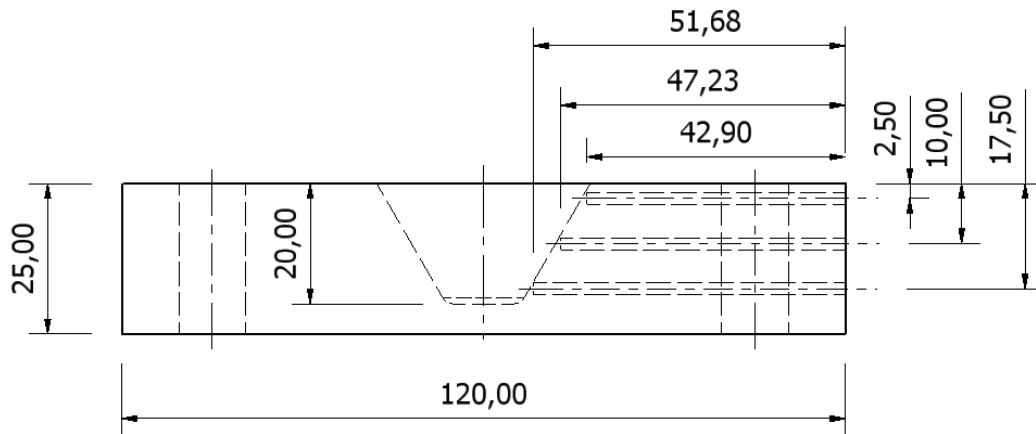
Thermocouple Hole Depths for Welds S.1 to S.4, RR-1 to RR-4 and FM-1 to FM-16
